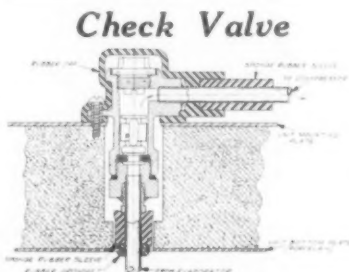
Check valve which prevents gas and oil from entering evaporator in off-cycle periods.
